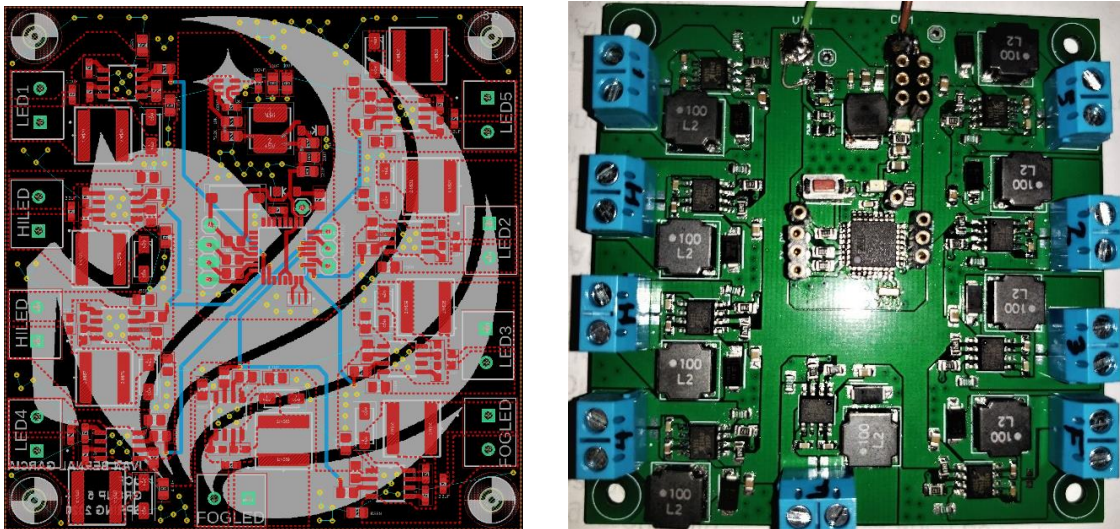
PCB Rev. 2 layout (76 mm x 77 mm) Testing our boards
